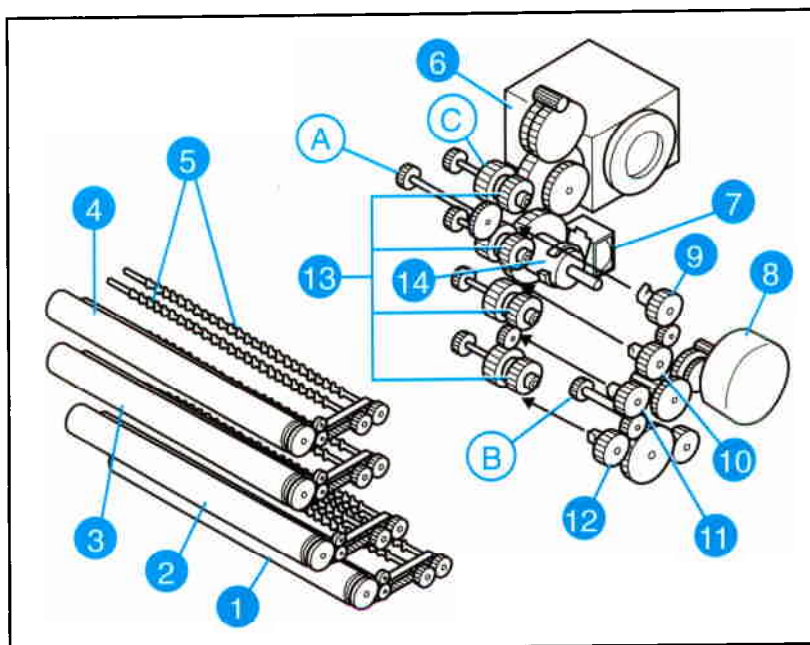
M2 and M3 in the Developer Drive Assembly
